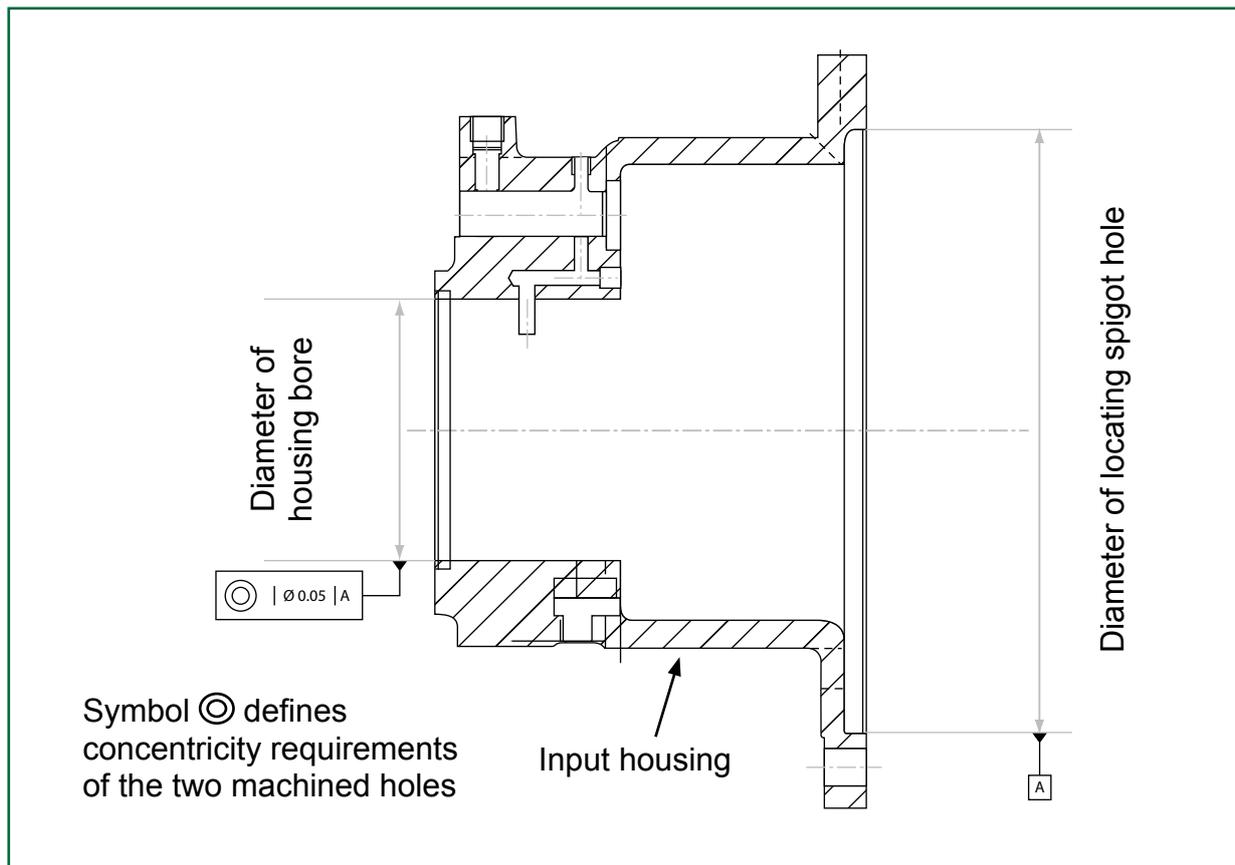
Concentricity of locating spigot hole relative to the housing bore for the bearings
